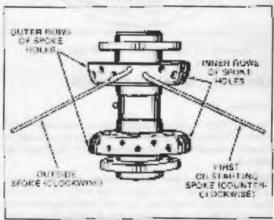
Starting Spokes in Wheel Hub -16 Inch Wheel
